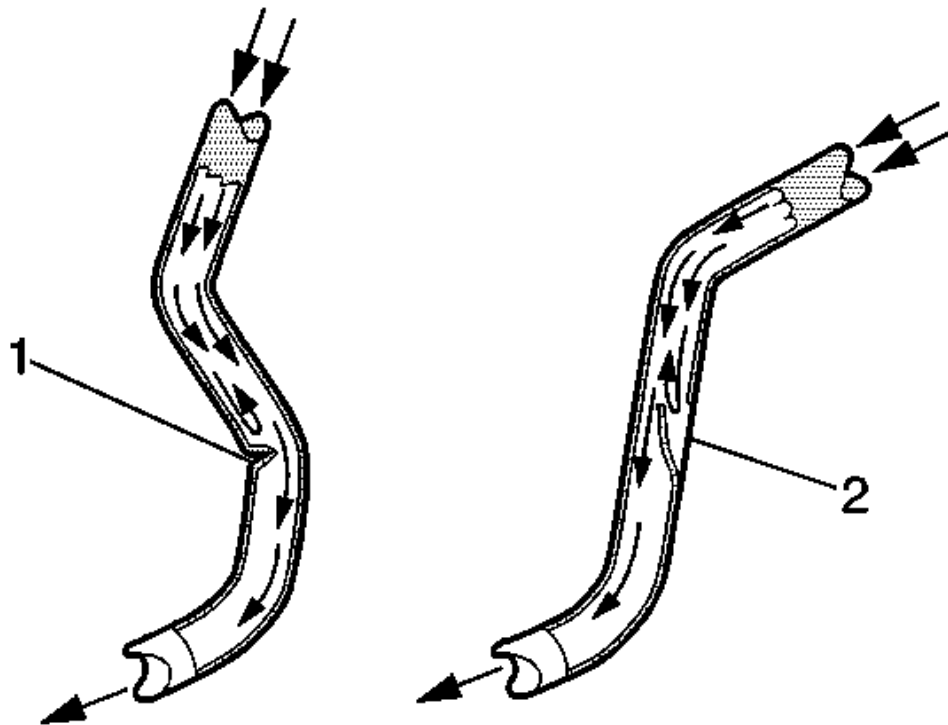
Identifying Flexible Brake Hose Failure Conditions
